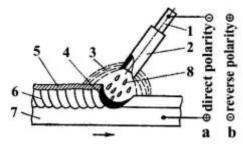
Direct (a) and reverse (b) polarity in welding process: 1 - core of electrode (wire); 2 - luting; 3 - gas protection; 4 - weld bath; 5 - slag crust; 6 - weld; 7 - base metal; 8 - drops of liquid metal
